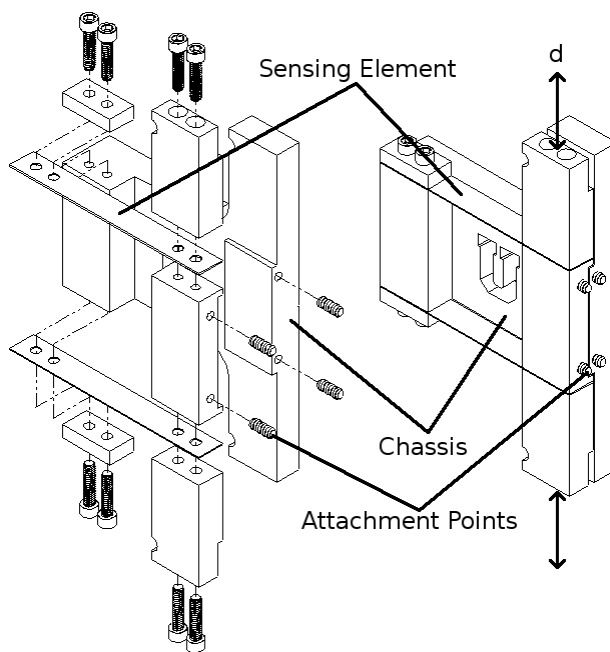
Exploded view of the shear extensometer. The left set of attachment points move through a vertical displacement d during a test.
